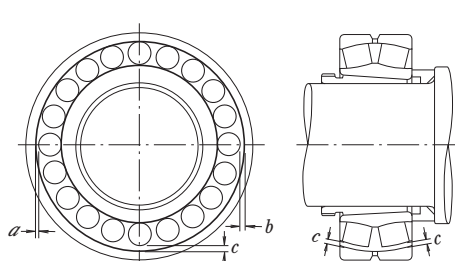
Measuring Clearance in Large Spherical Roller Bearing
